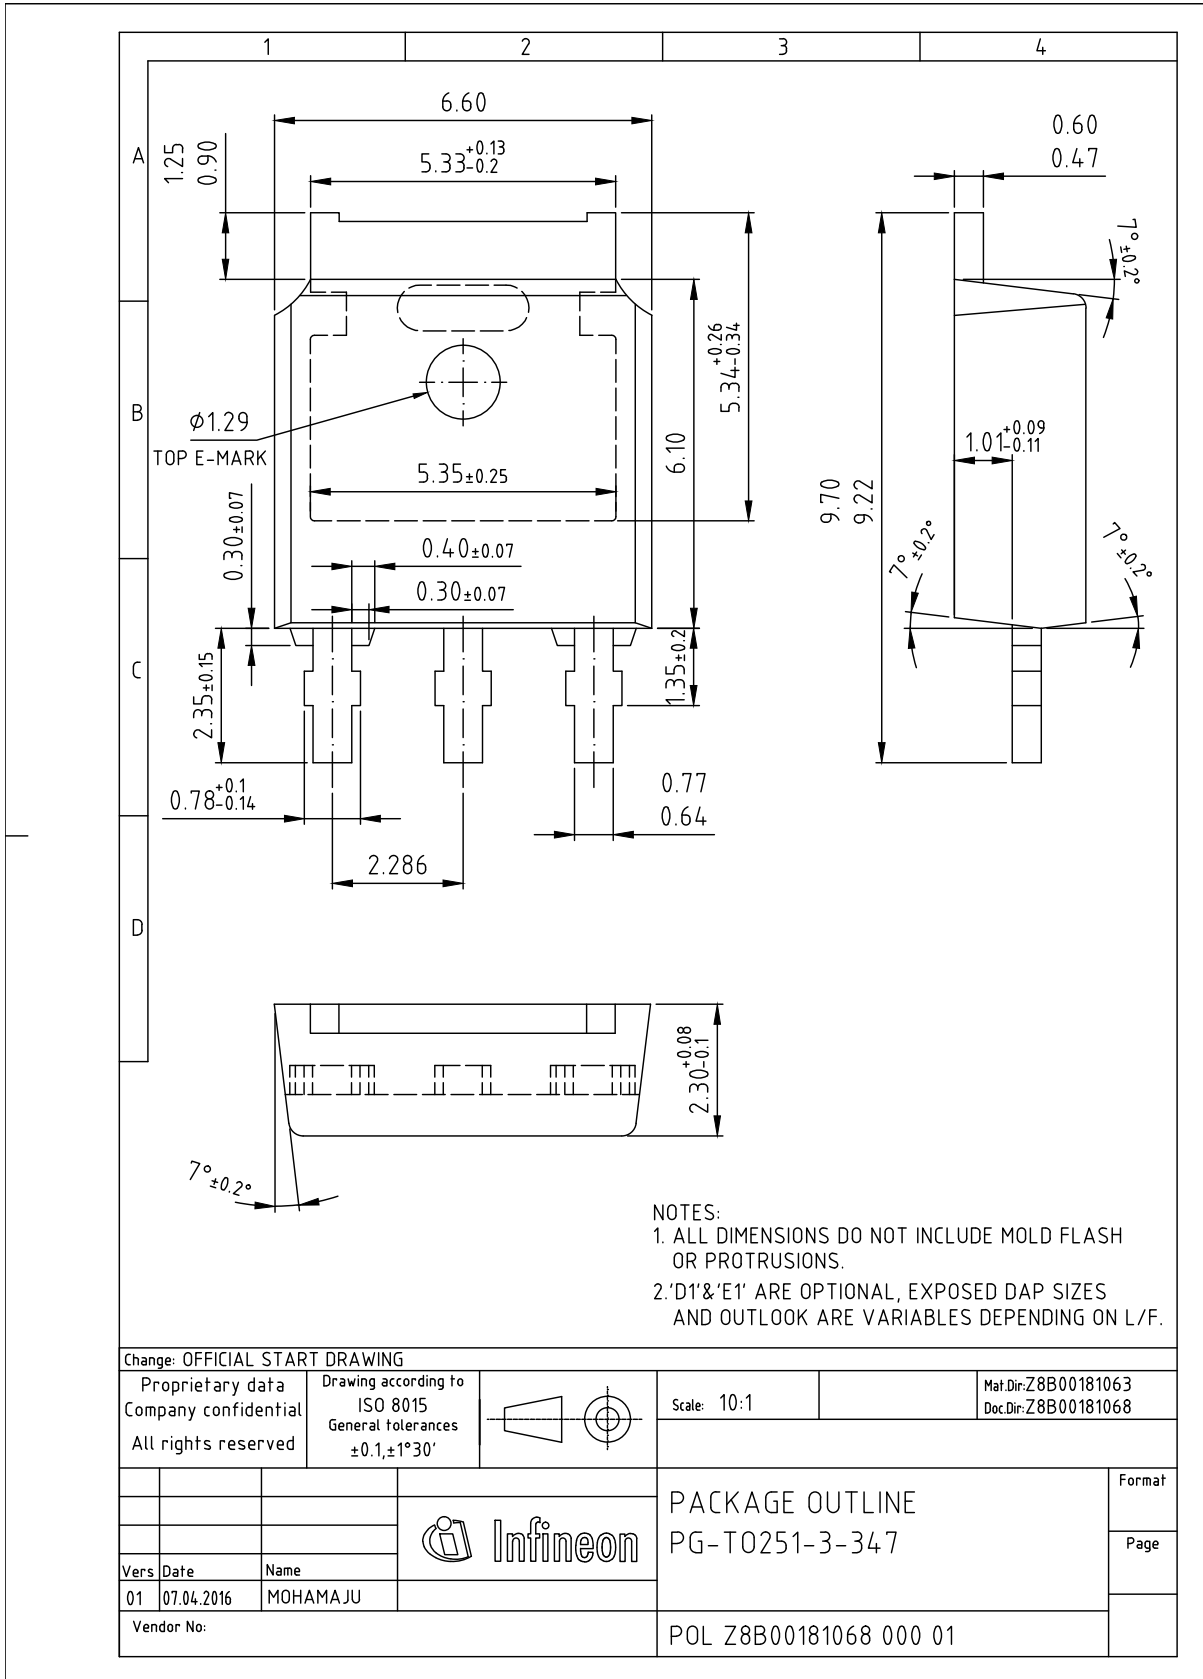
Outline PG-TO 251, dimensions in mm/inches
